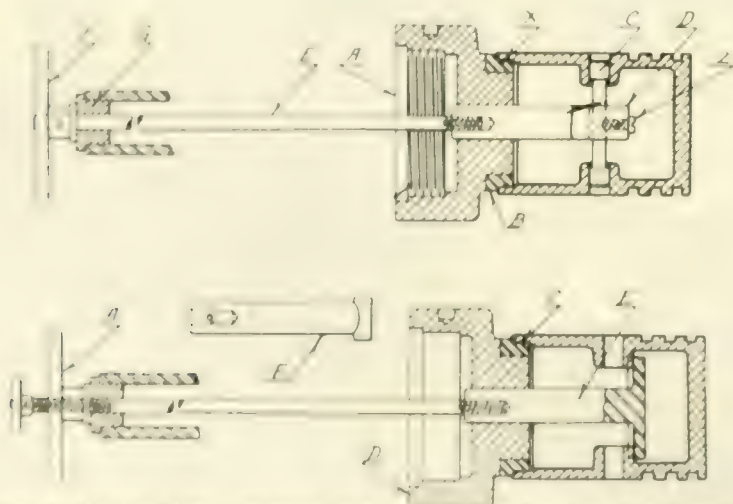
SIDE VIEW OF PISTON HOLDER WITH DRAWBACK ARRANGEMENT. FIG. 2. TOP VIEW OF PISTON HOLDER. FIG. 3. HOOKED TYPE OF PISTON DRAWBACK ROD.
